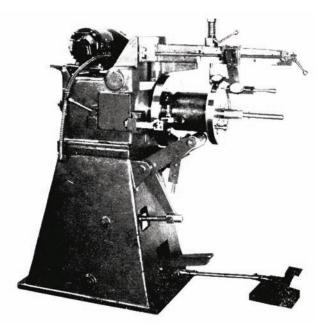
Typical Machine for Checking Coupling-Thread Alignment
